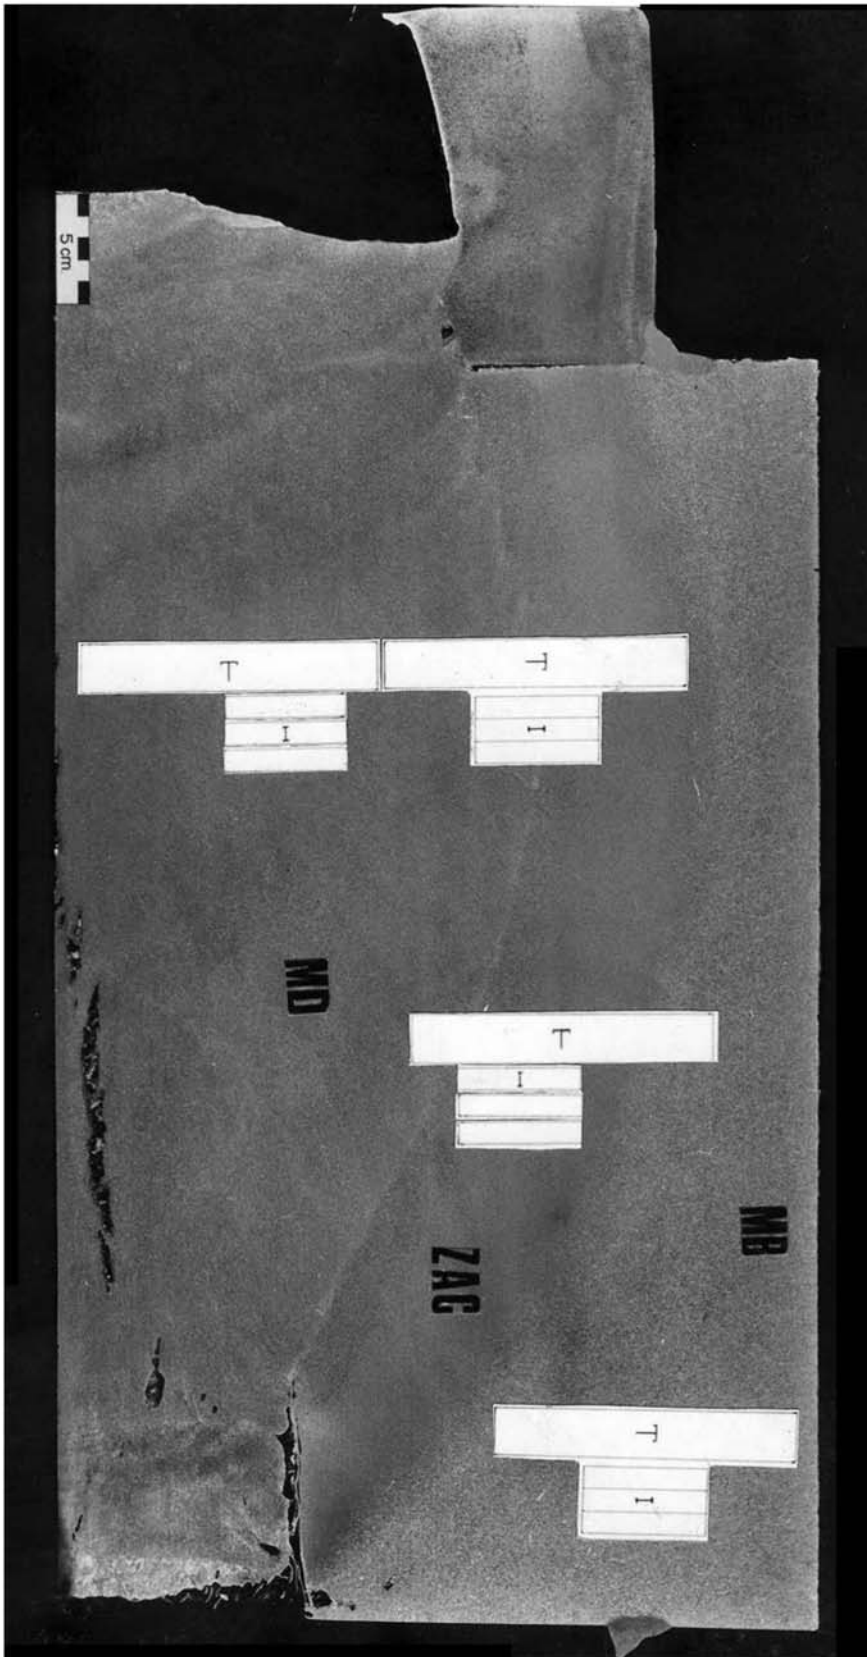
Transverse cross section of an experimental electroslag weld of two forged blocks of AISI 1045 steel. The weld was sectioned along the axis of the weld deposit (MD), so only a single block of base metal (MB) can be seen. Hot tears close to the weld axis can be observed. Porosity close to the starting block (at the bottom of the weld) is also observed. Penetration and heat-affected zone (ZAC) are large in this process. The heat-affected zone extends for more than 50 mm (2 in.). The location of test specimens to evaluate the process are indicated. Etchant: hot hydrochloric acid.
